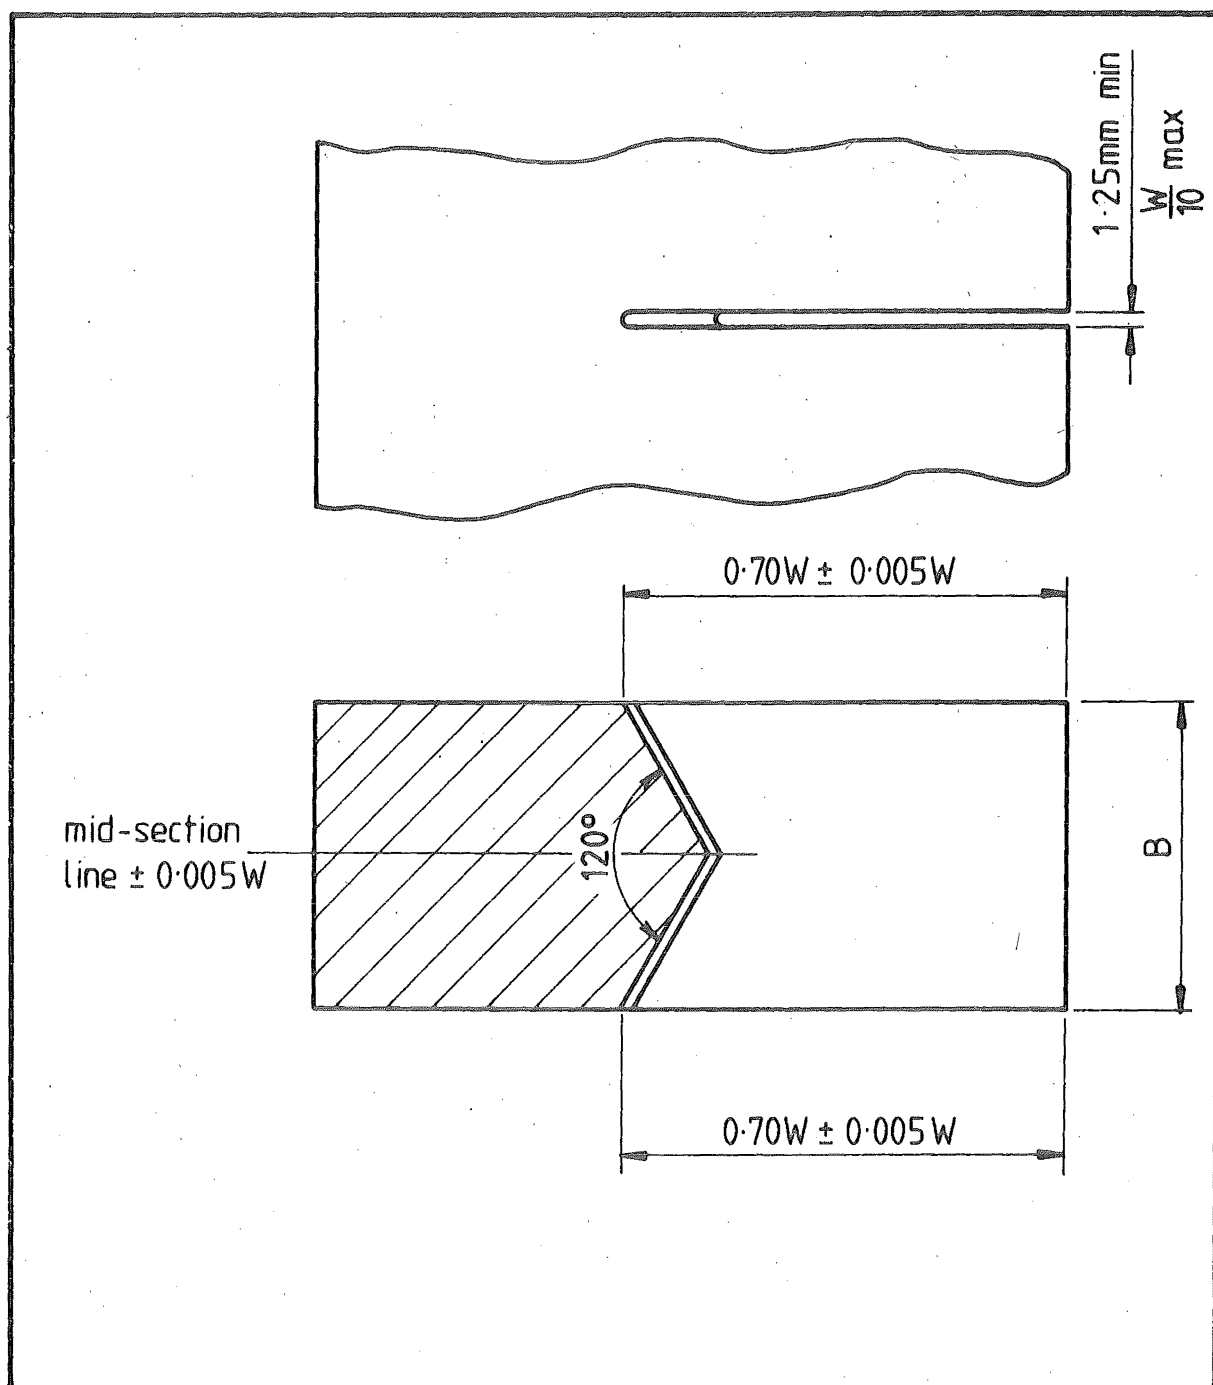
THE MODIFIED CHEVRON CRACK STARTER
